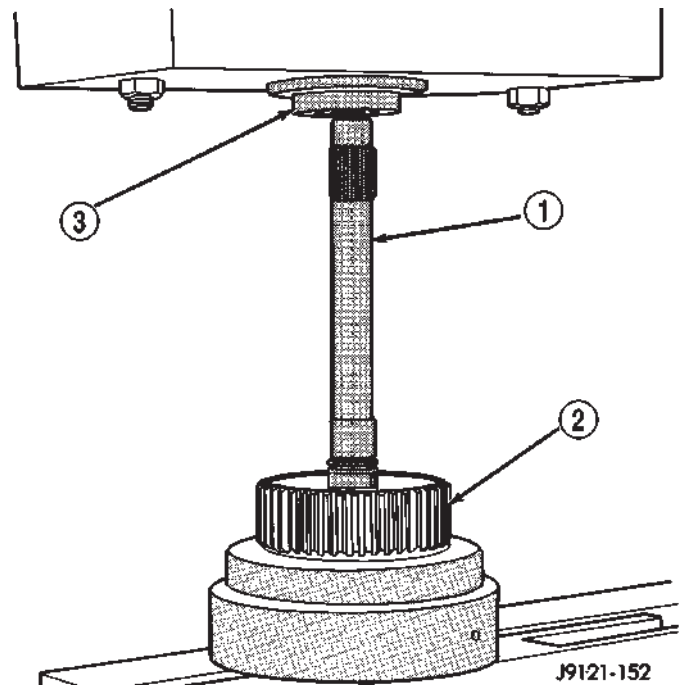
Pressing Input Shaft Into Rear Clutch Retainer
